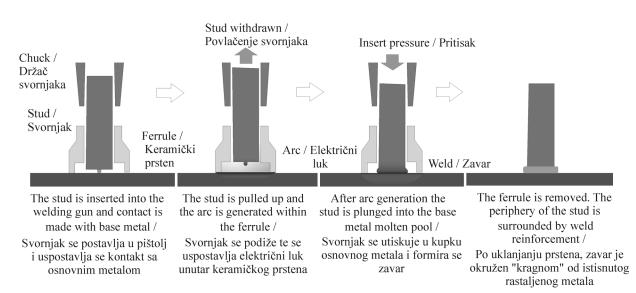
Welding operation sequence for drawn arc welding with ceramic ferrule [12] Slika 6. Proces zavarivanja svornjaka "povlačenjem" luka s keramičkim prstenom [12]
